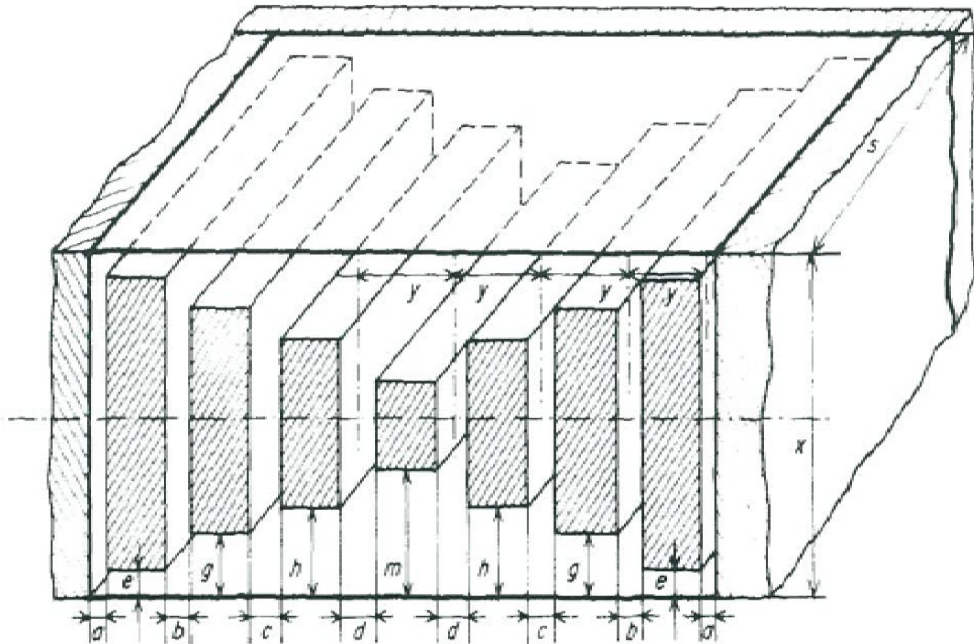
Isometric drawing of actual coupler shape and construction taken from [7].
